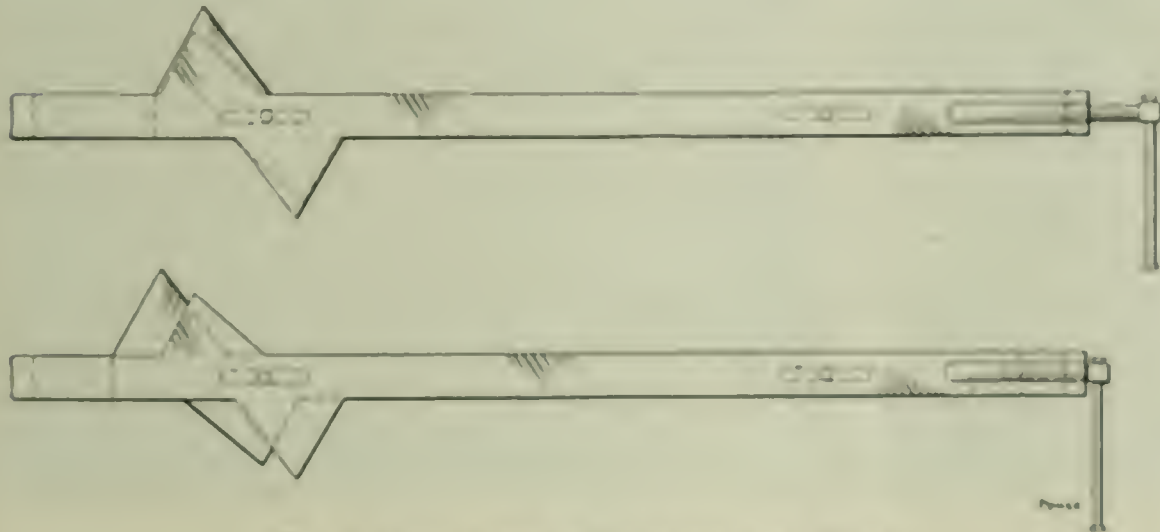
TOOL USED FOR SPRINGING THE TUBES
